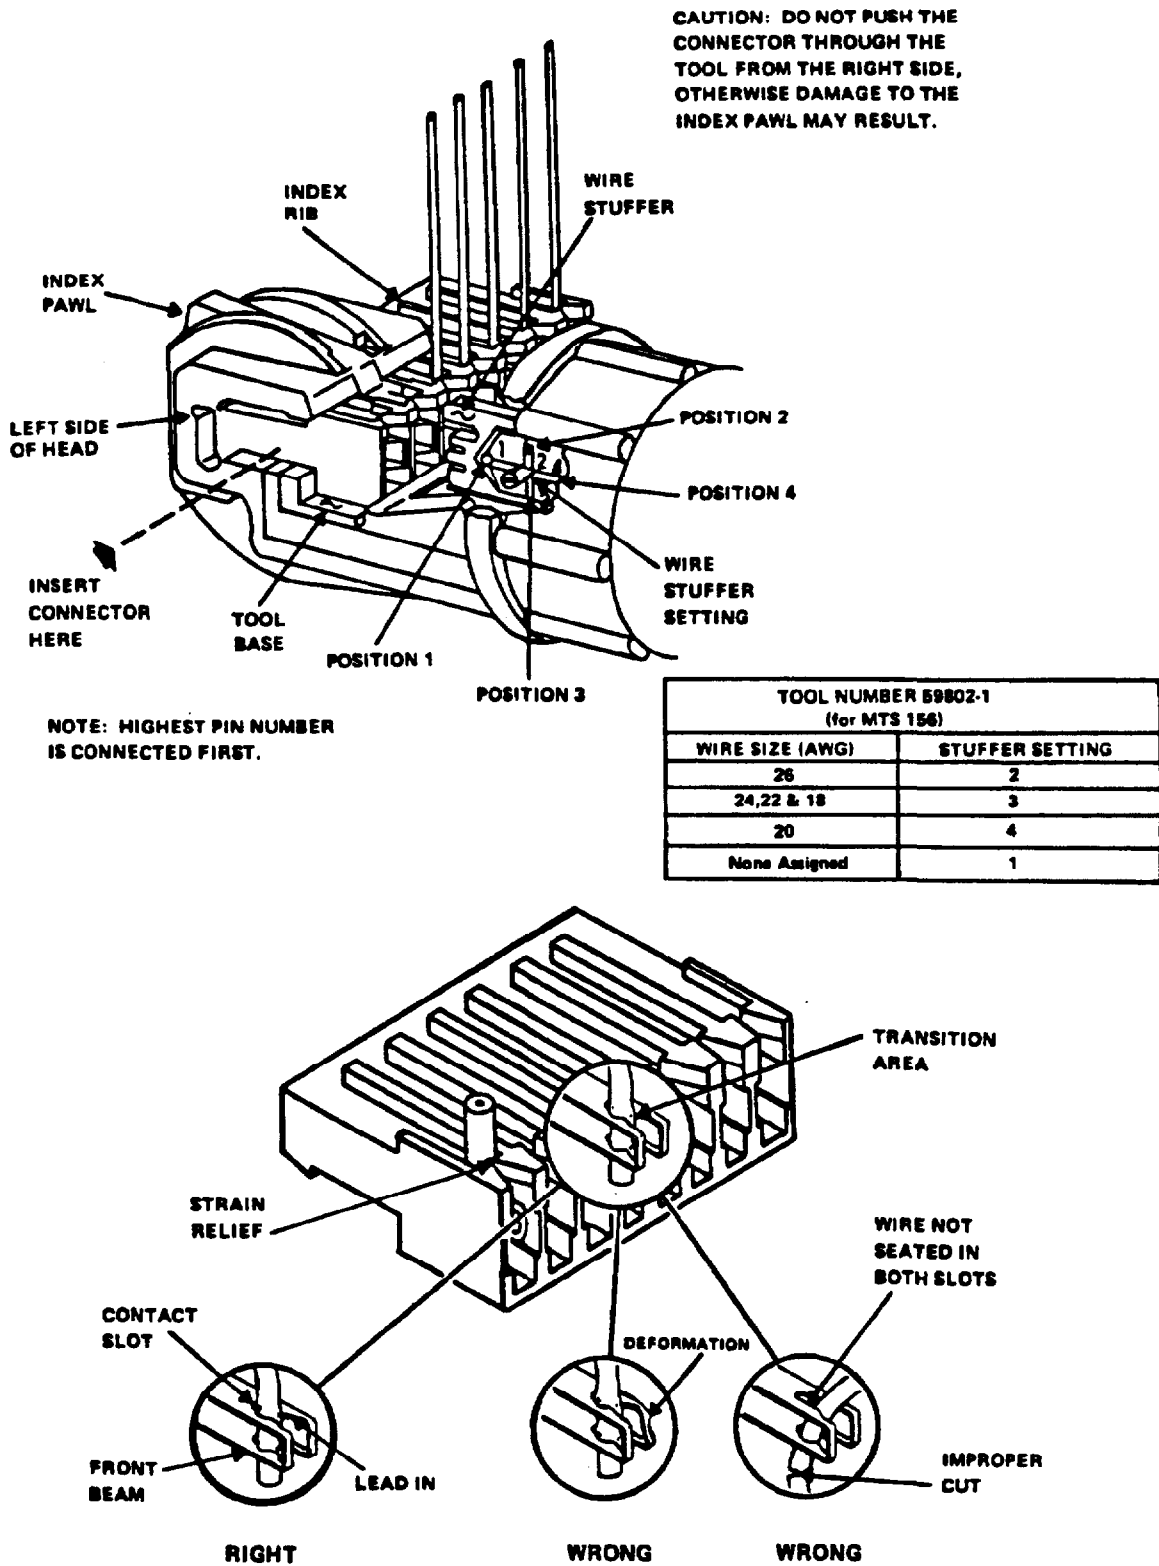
MTA Pistol Grip Tool Termination Procedure and Contact Inspection
